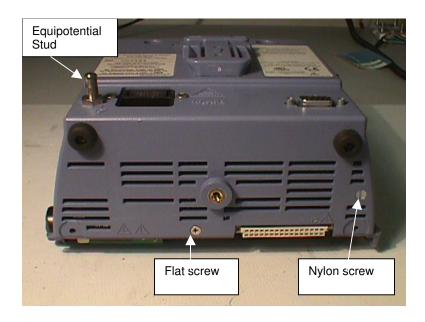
Place rear case assembly face down on a scratch free work surface
